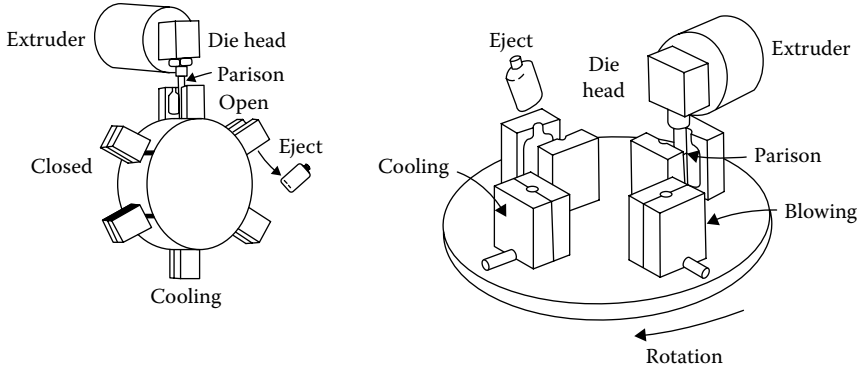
Vertical wheel type of continuous extrusion blow molding machine; molds are carried to the die head by rotation of the wheel. In a horizontal table type, all steps of the process are carried out simultaneously also. (Data from Morgan, B. T. et al., *Mod. Plast.*, 45, 797, September 1967.)
